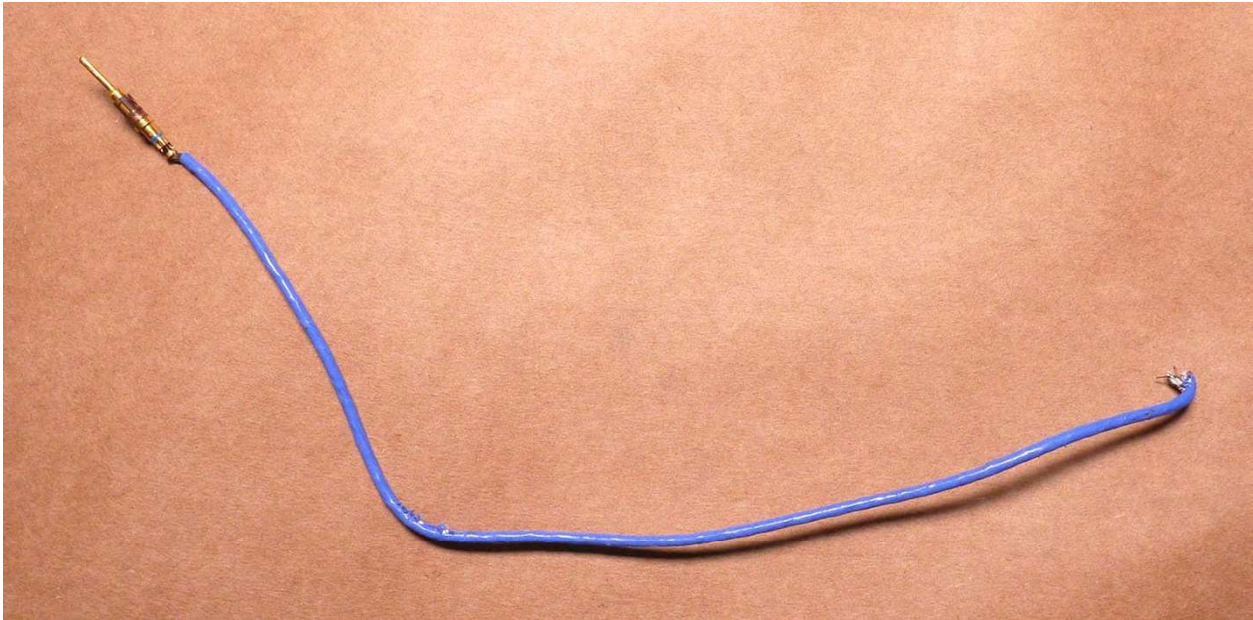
RMLG blue wire fractured end with jacket peeled back
